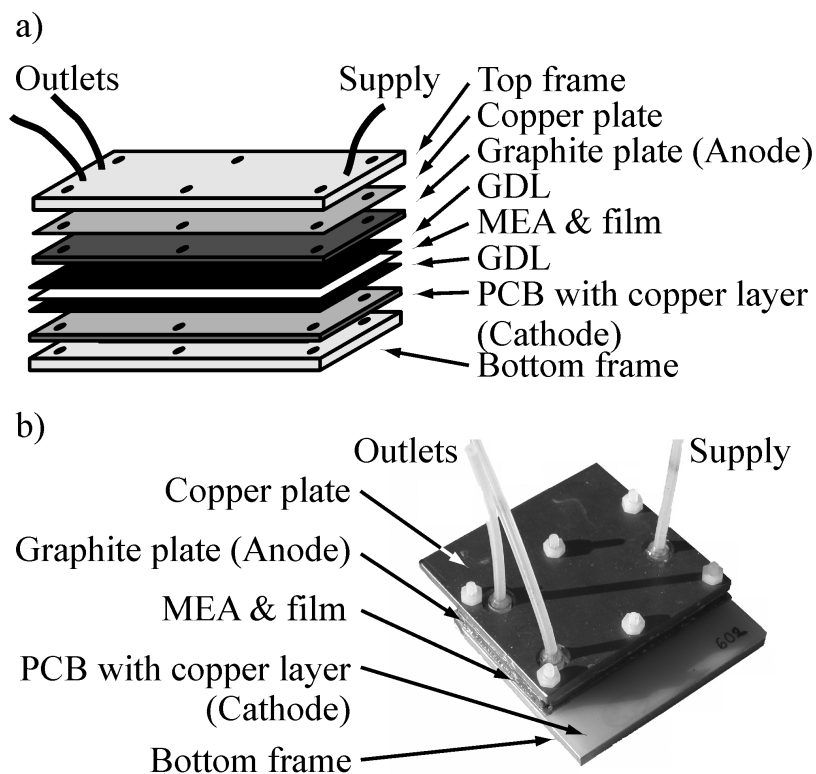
a) Draft of the prototype fuel cell assembly (not to scale). b) Photograph of the assembled prototype fuel cell.
